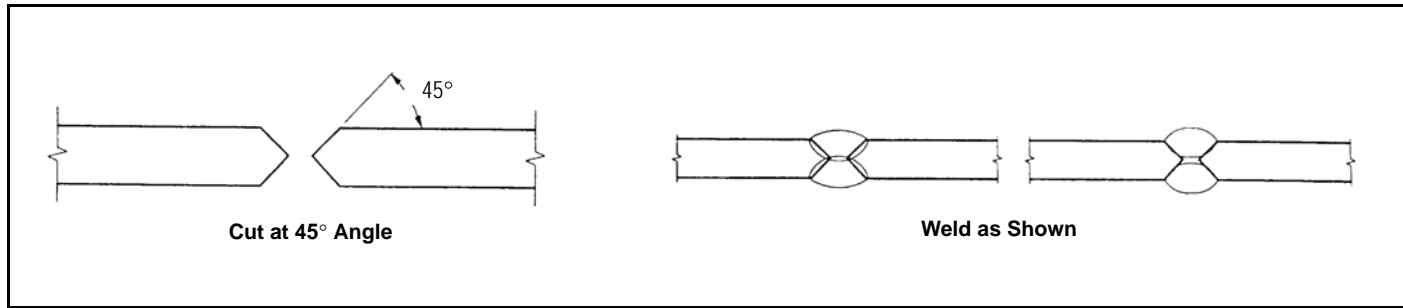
Frames – Preparation of Joint for Welding Extension
